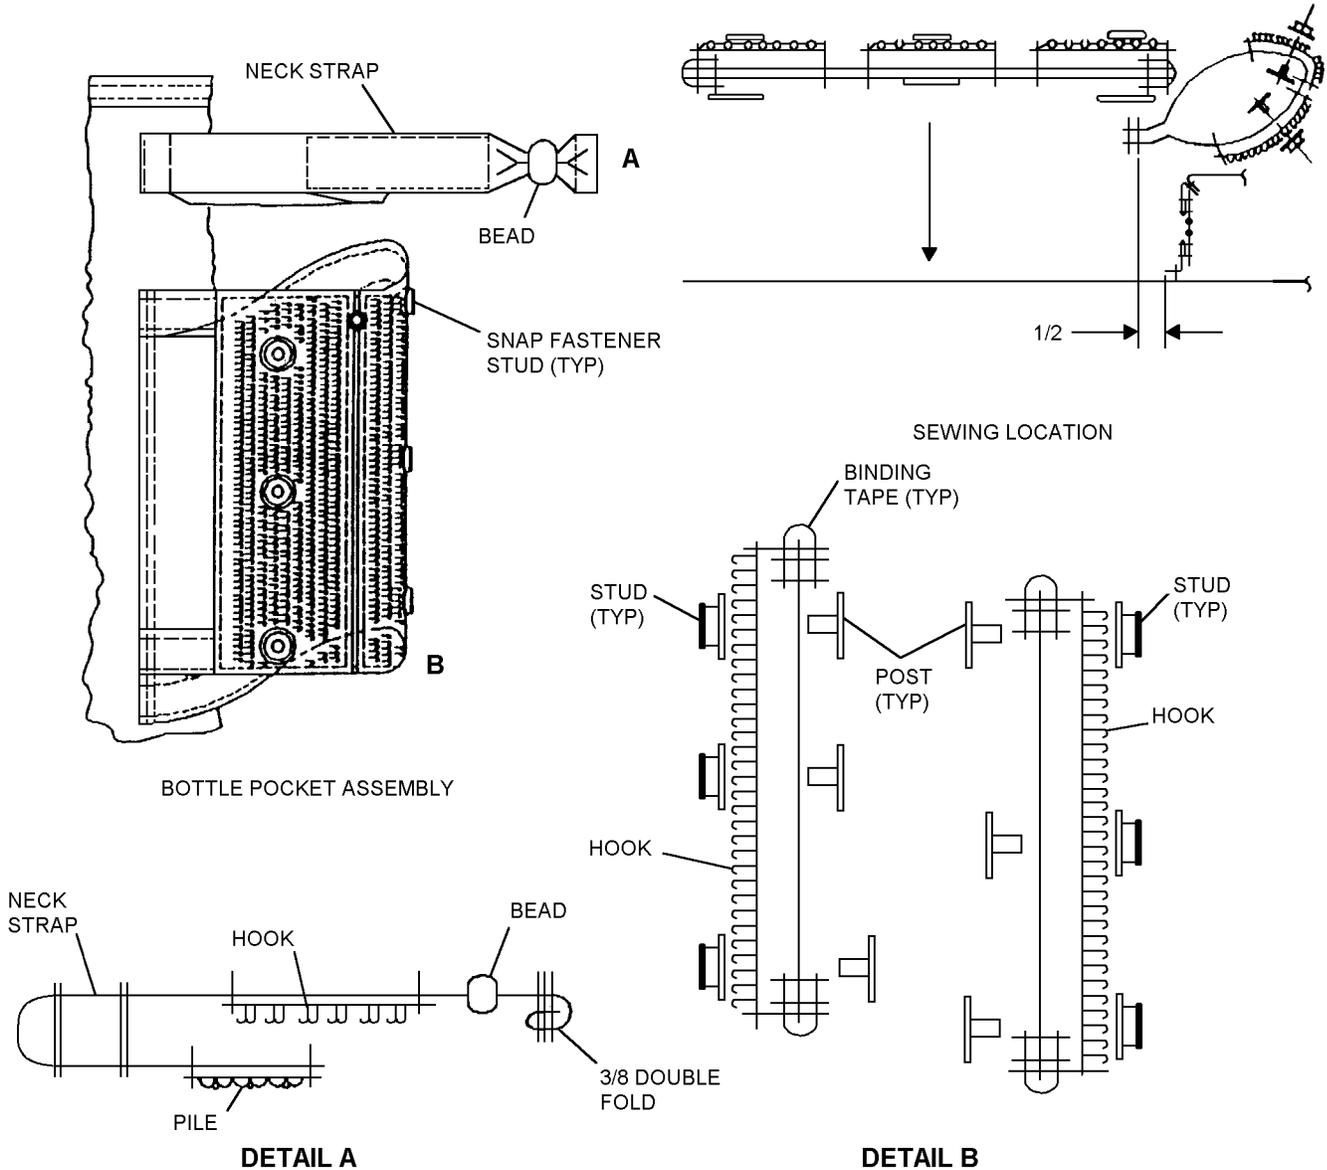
Fabrication of SRU-40/P HABD Bottle Pocket Assembly
